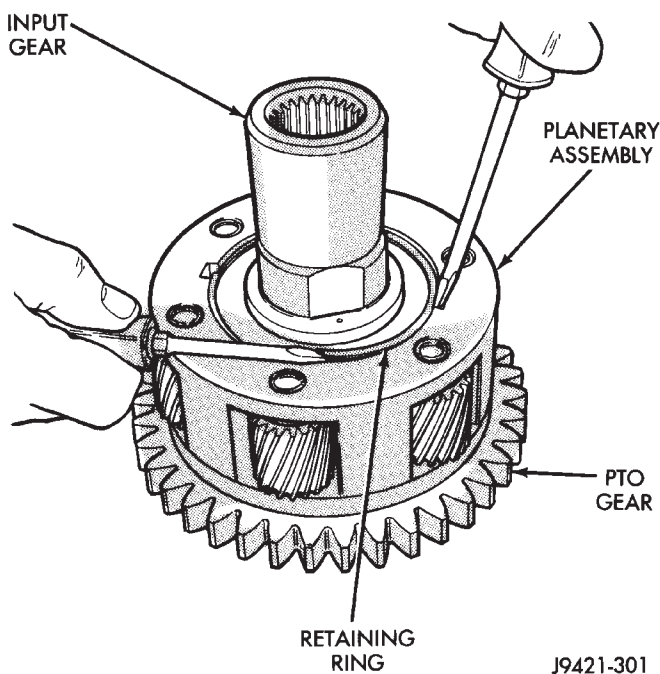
Removing Lock Ring/Input Gear Retaining Ring
